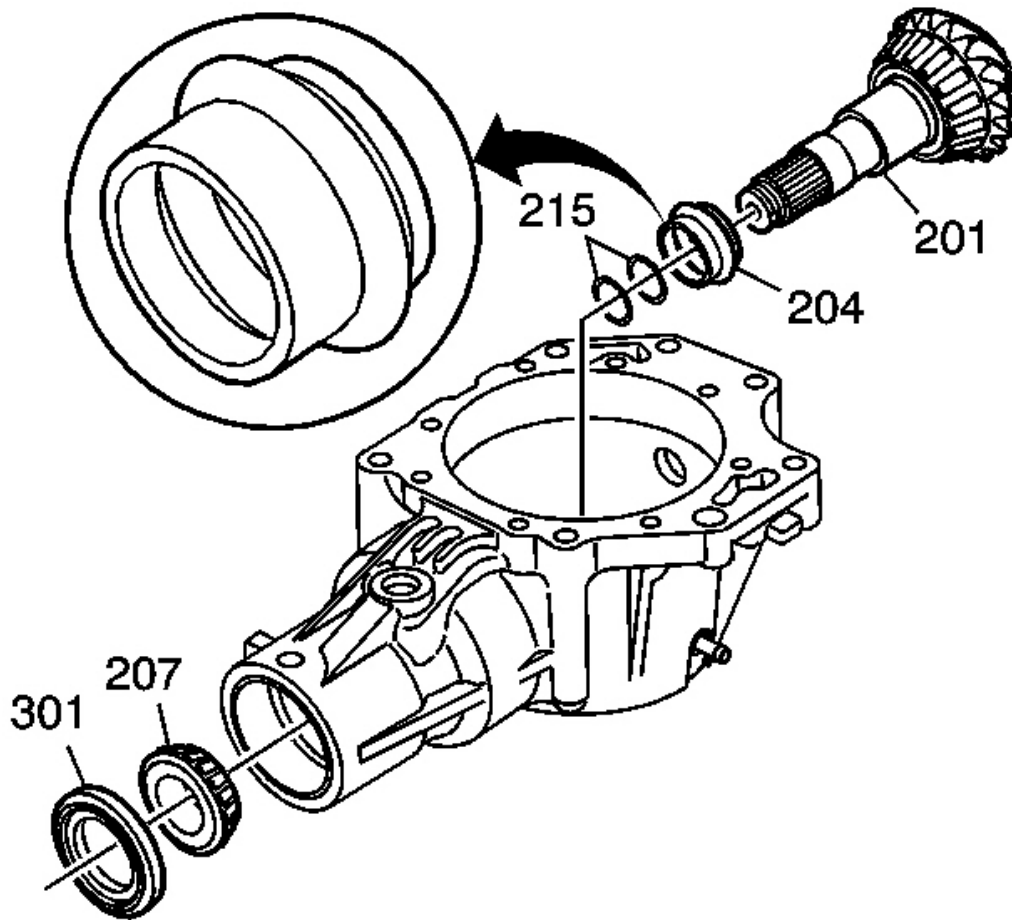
Removing/Installing Output Shaft, Collapsible Spacer, Washer, Seal, & Bearing
